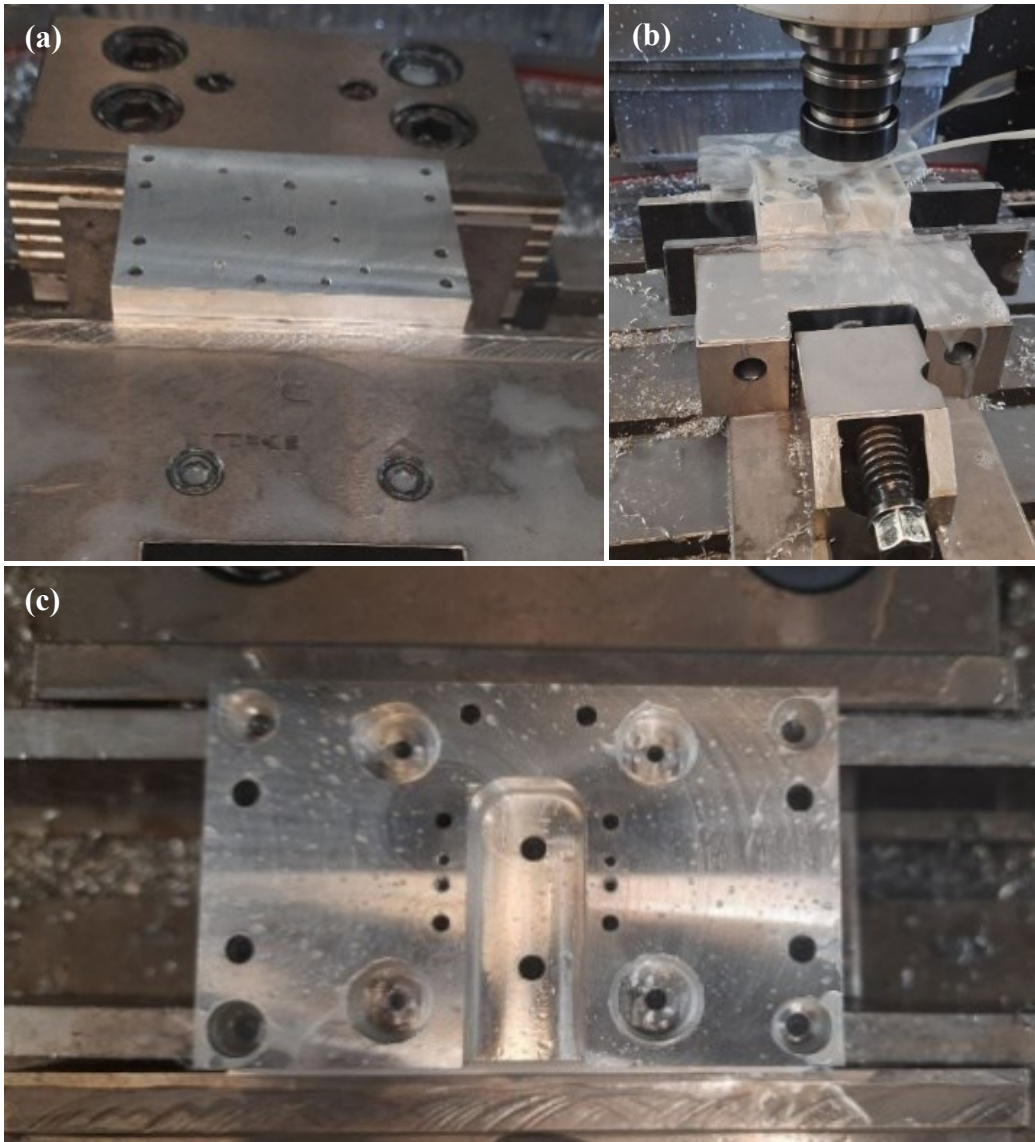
First face radial car middle during machining process (Left: fixing part and drilling holes, middle: machining other details, bottom: end of first face machining)
